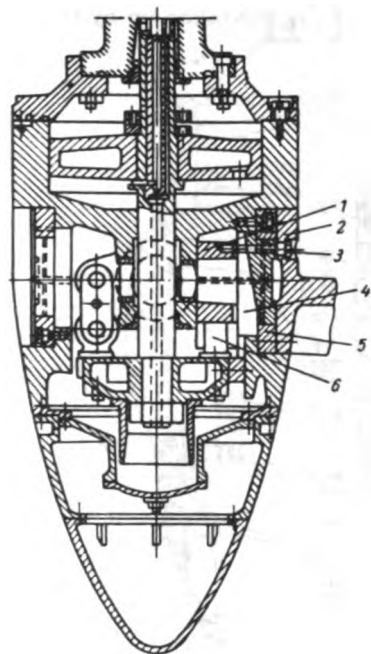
Blade-actuating mechanism with crank drive and removable pivot
